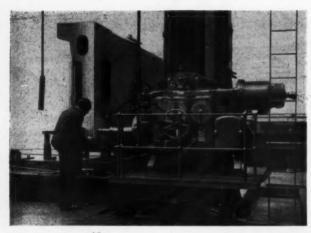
Boring a location hole for a feed bearing bracket in the upright for a Butler No. 8 Spiral-Electric planer on a 6-in. spindle, Asquith floor-type machine. The cored hole is first rough machined, then finished to 5 in. diameter, \pm 0·0005 in. using a Microbore tool, with a high-speed steel cutting bit, which is run at 100 r.p.m., and fed at a rate of 0·008 in. per rev. This Asquith borer is also used for facing the ends of the upright, with a 16-in. diameter cutter mounted directly on the facing head of the spindle. A speed of 50 r.p.m. is employed, and from $\frac{1}{2}$ to $\frac{3}{4}$ in. of metal is removed from each surface
